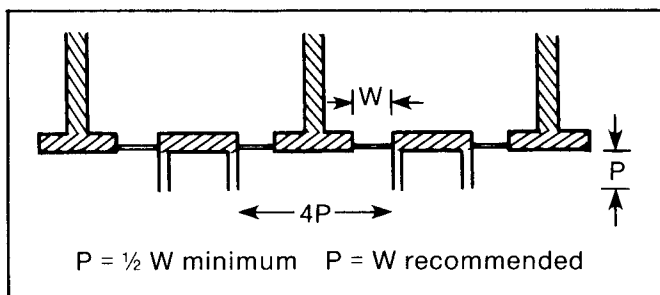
Recommended Wing Wall Dimensions and Separations
